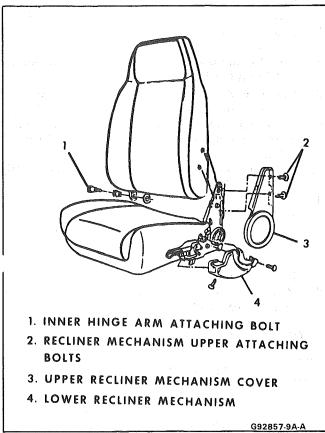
Recliner Mechanism Upper and Lower Escutcheon
